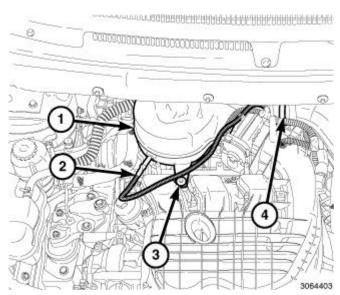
Resonator, Electrical Connector, Push Pin & Clamp Courtesy of CHRYSLER GROUP, LLC
